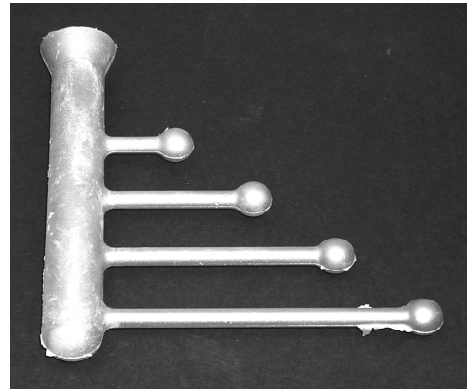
Casting produced with an alloy having high resistance hot-tearing
